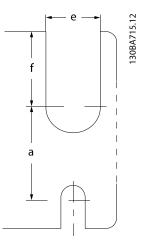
Top and Bottom Mounting Holes (B4, C3, C4)
